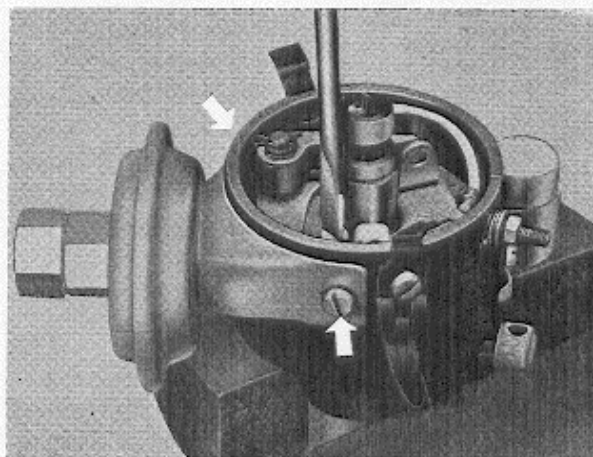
Removing the vacuum regulator. VOLVO 24871
